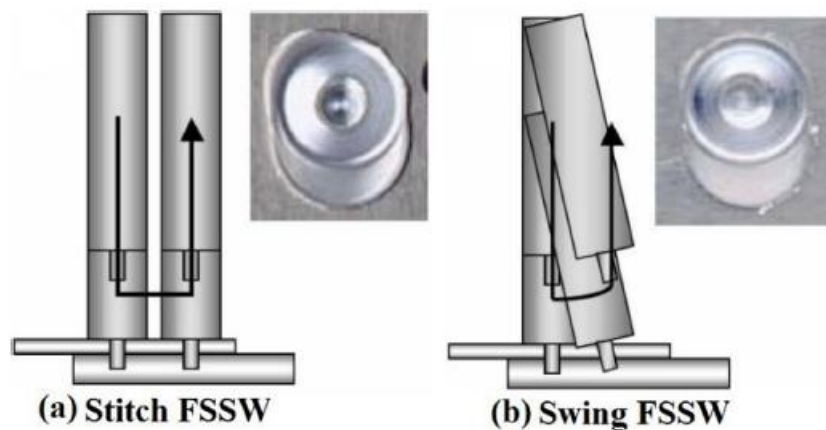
Short traverse Friction Stir Spot Welding processes (a) “stitch FSSW”(b) “swing FSSW” [23]
